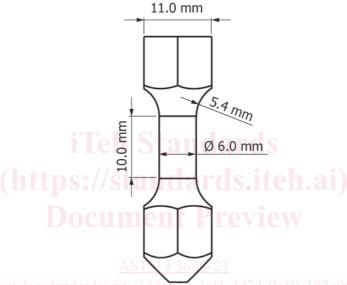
Suggested Dimensions of the Torsion Specimen
